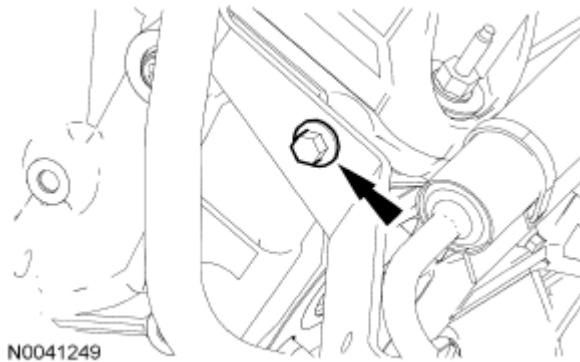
Locating PSP Hose Bracket To Cylinder Head Bolt
